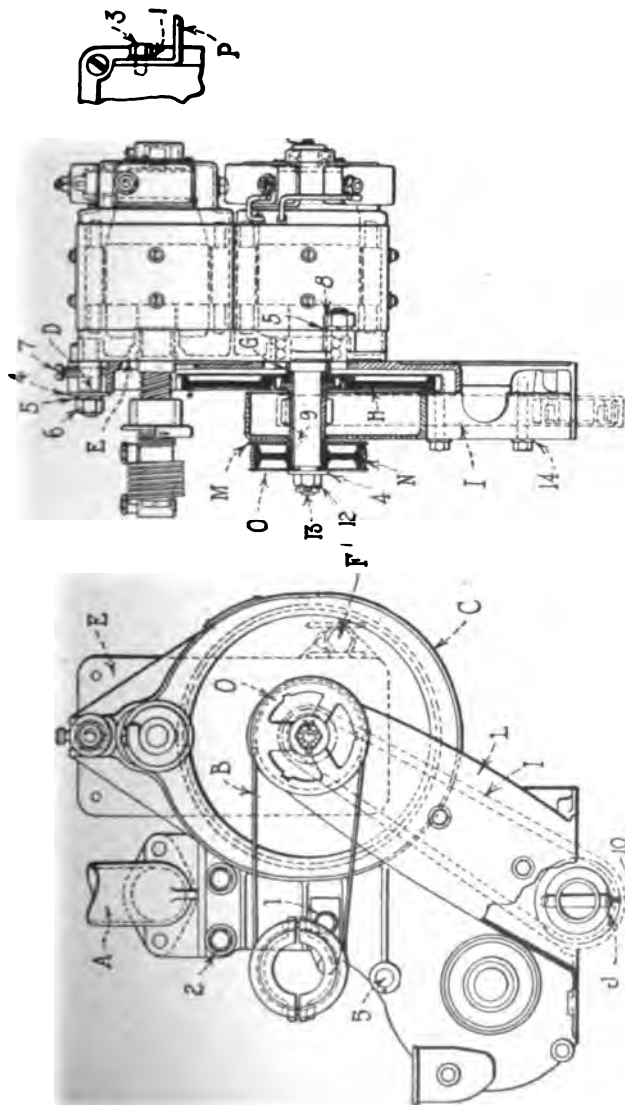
Front and side views of Heinze-Springfield motor and generator installed on Ford car
